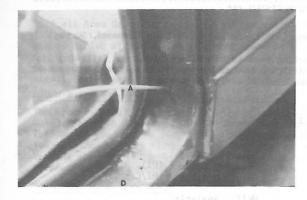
Application into bottom of B-post & door sill A - applicator extension, B - B-post, D - door tread sill
